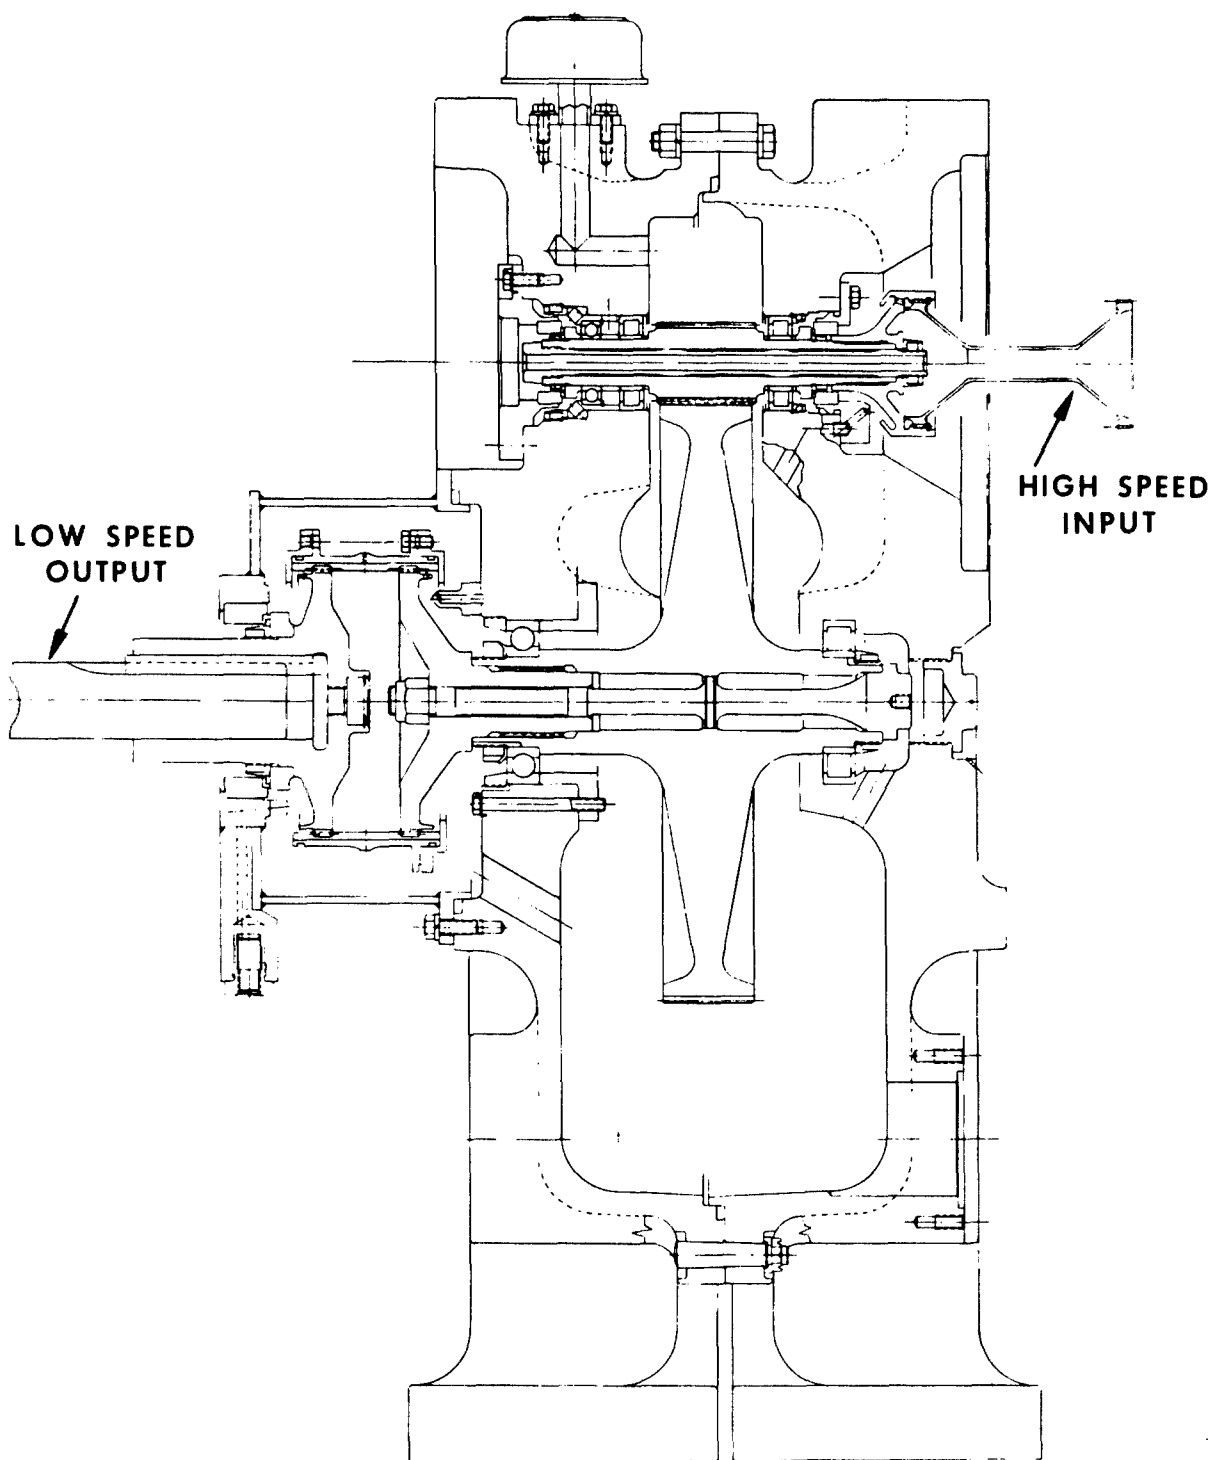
Reduction Gearbox for Fluid-Cooled Turbine.
